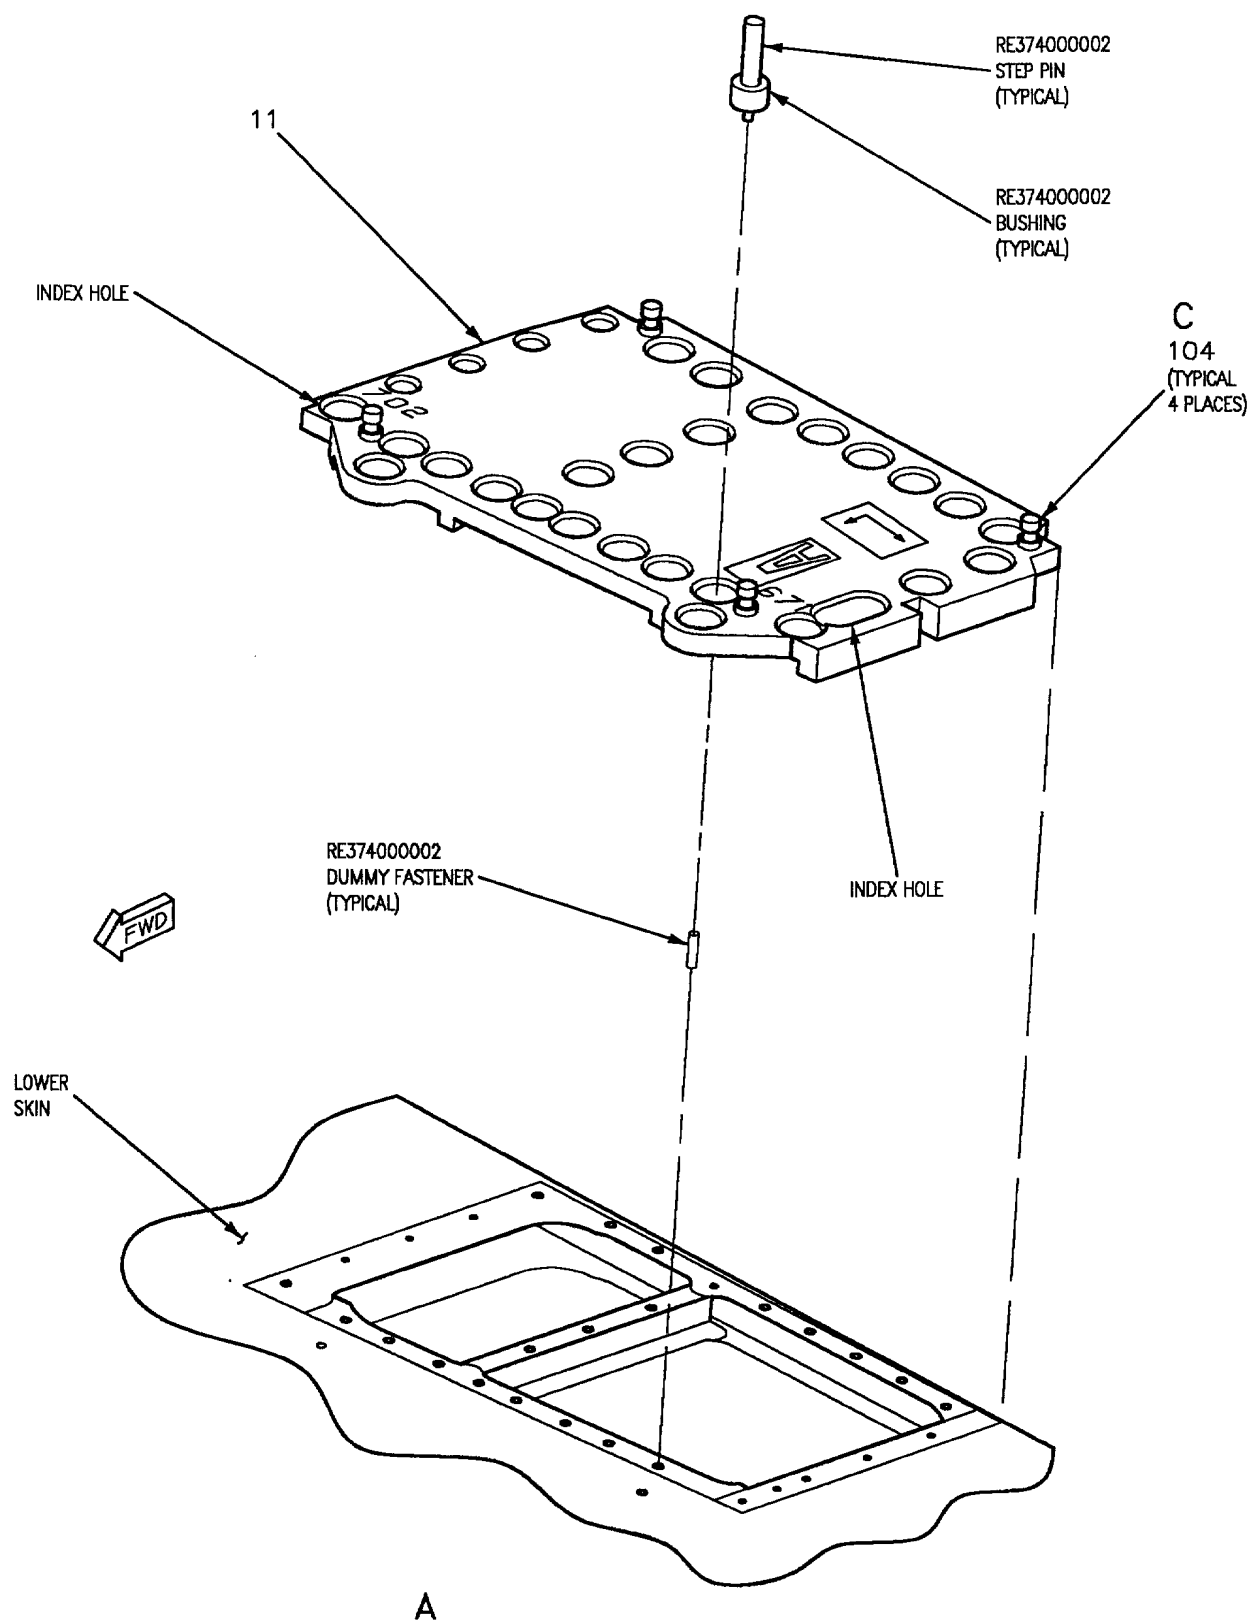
Installation of Plate Set for Drilling 74A150824 Skin (Sheet 1)
